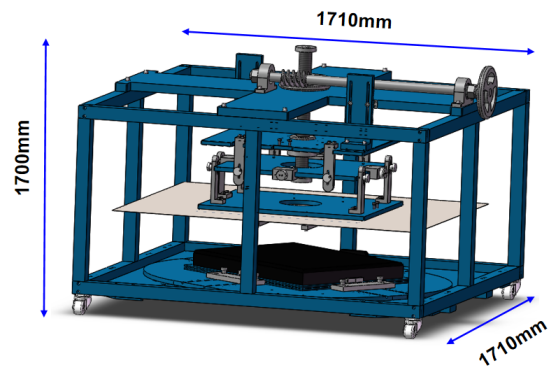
Design model and dimension drawing of non-launch non-metal carrier.
